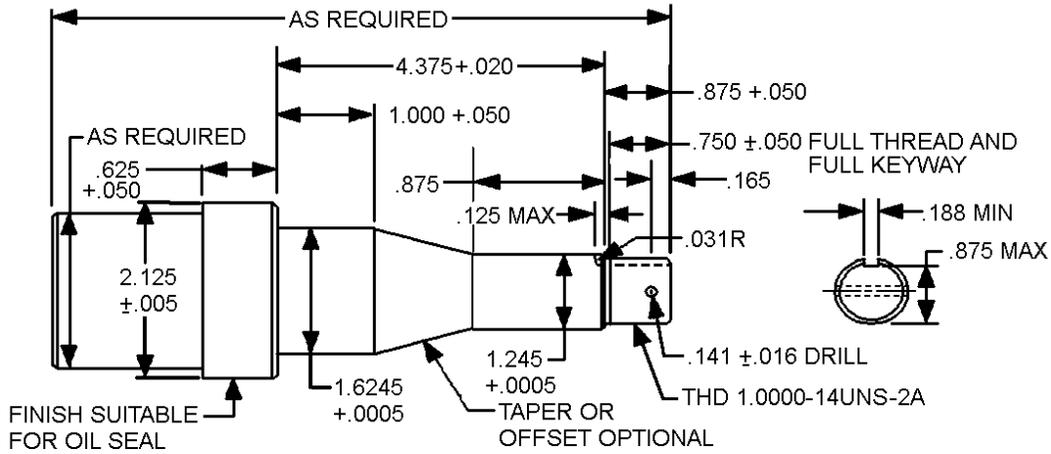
Hub assembly, cantilever mounting, for 6.00-9, 7.50-10, and 9.00-10 wheels.
